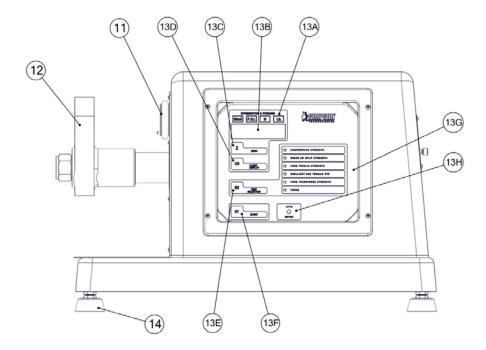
Front View - Electronic Universal Sand Strength Machine (Model 42104)
